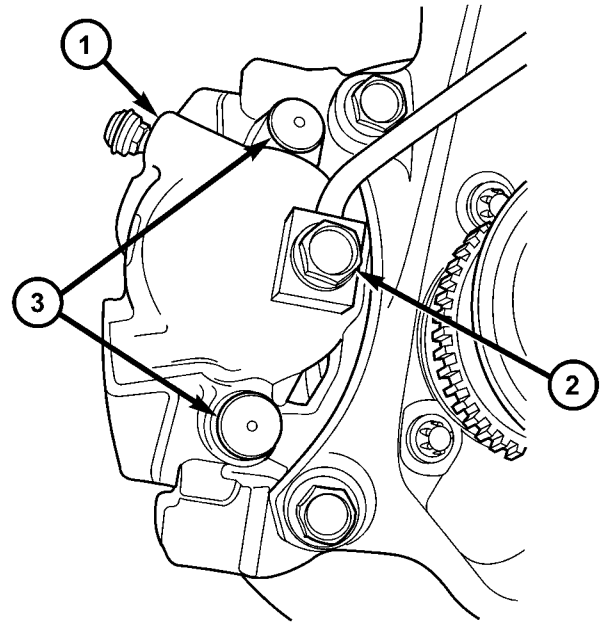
CALIPER GUIDE PIN BOLT CAPS
